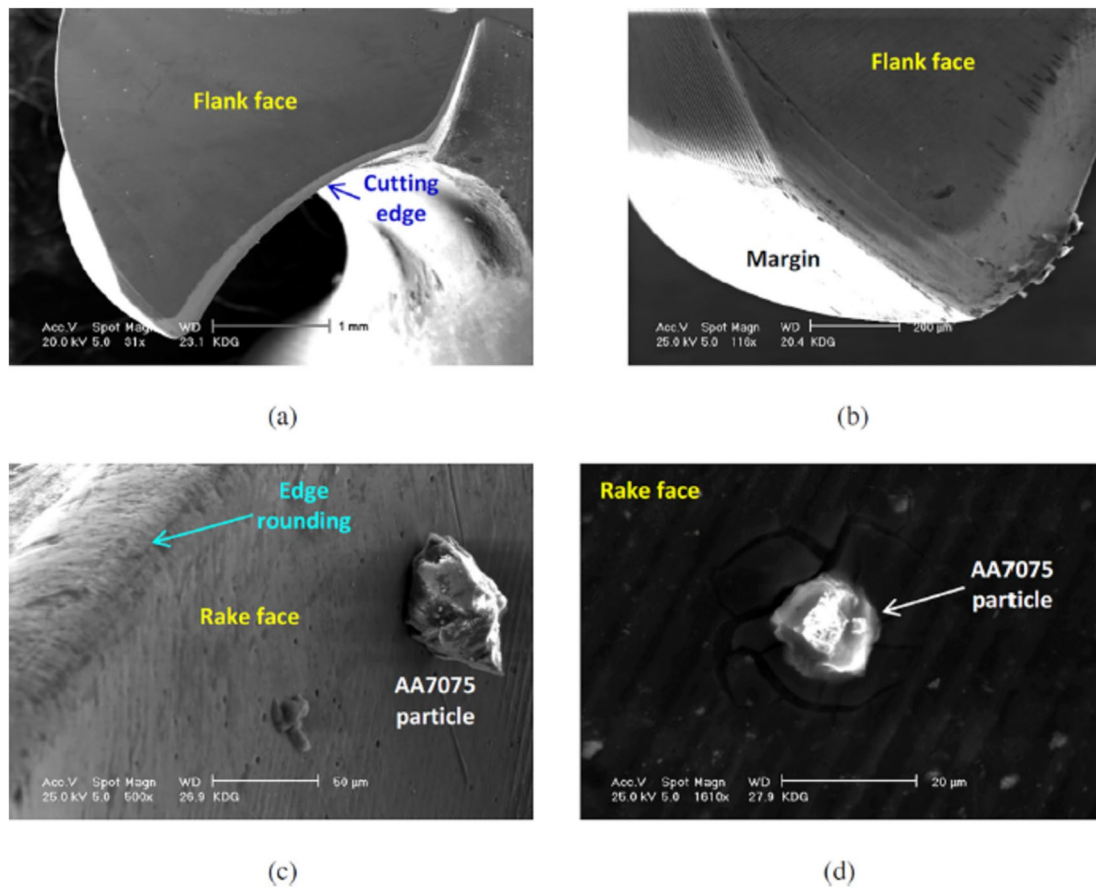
SEM images of the nanocomposite TiAlN coated drill after a number of holes equal to 170: (a) flank face, (b) flank wear, (c) edge rounding and rake face, and (d) fractured coating in the area surrounding Al particles stuck to the rake surface [63]
